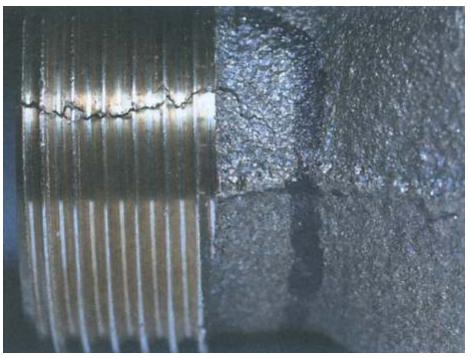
Lead-free brass casting, cracked during machining, is caused by severe stress and heat.
